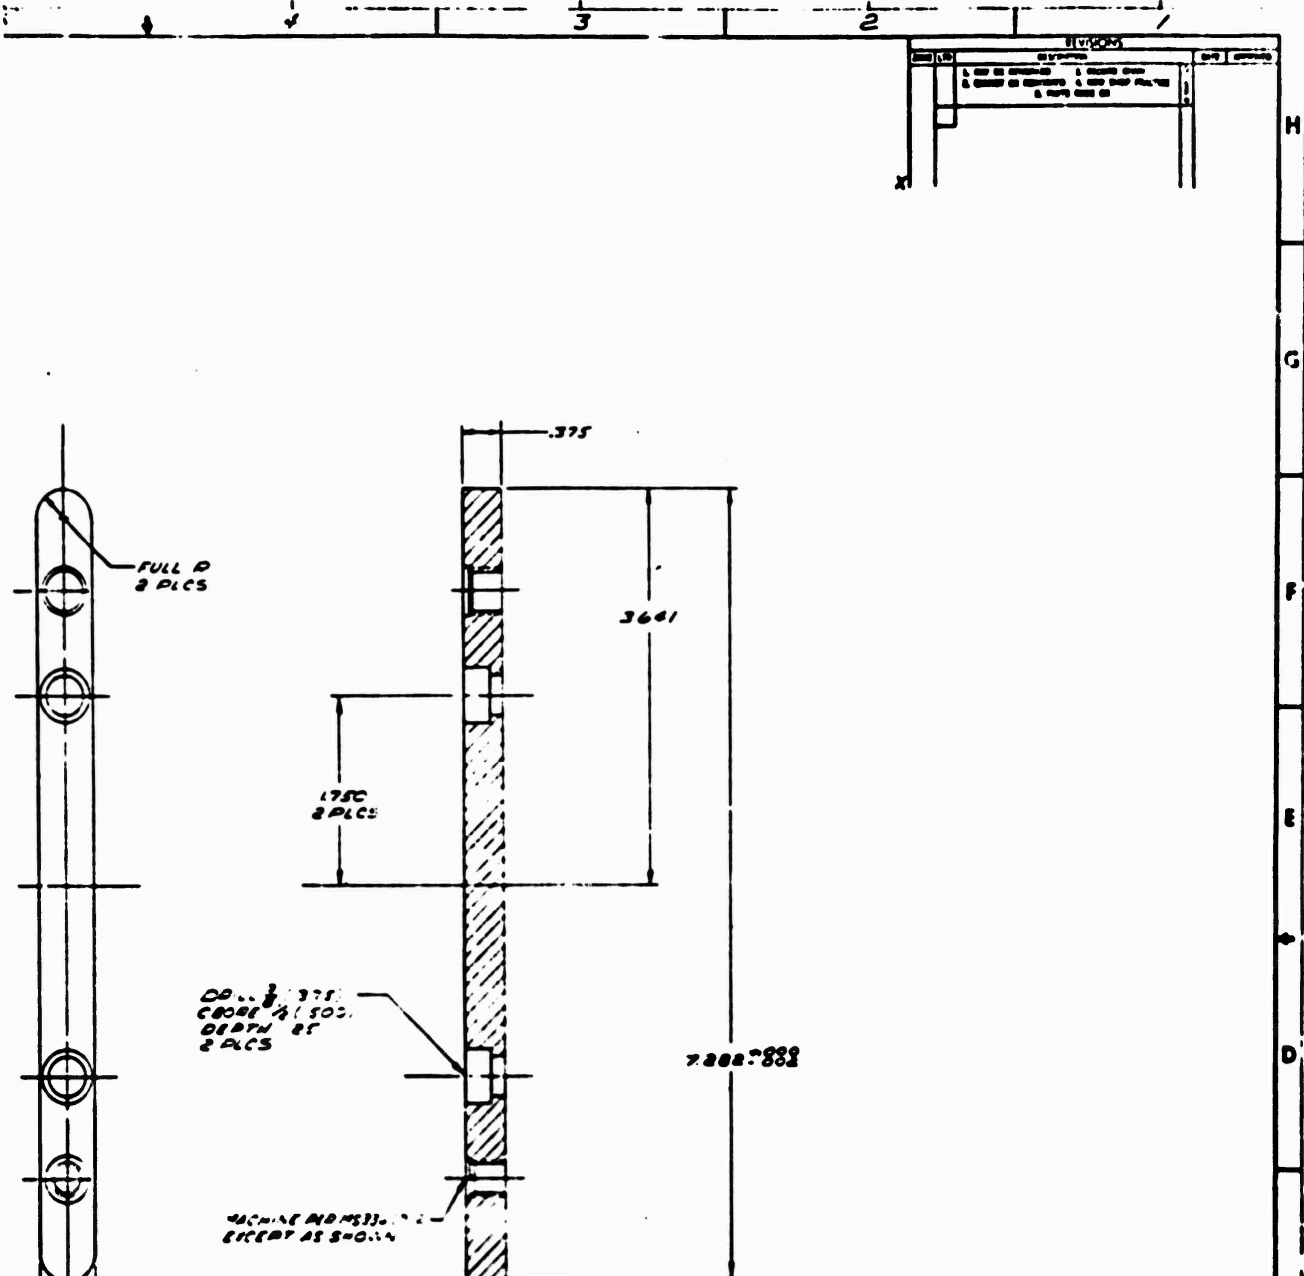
Double-Panel Injector, Unit 8 Triplet Assembly Design
